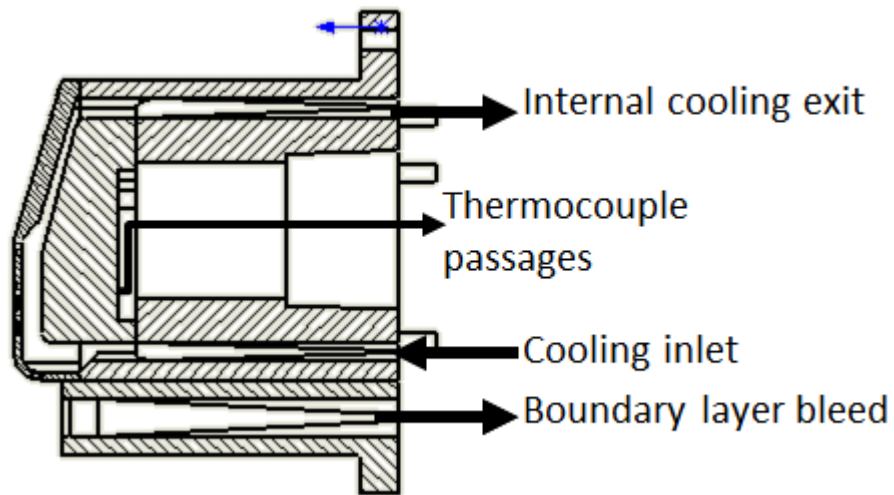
Cross section view of test block assembly with boundary layer bleed slot.
